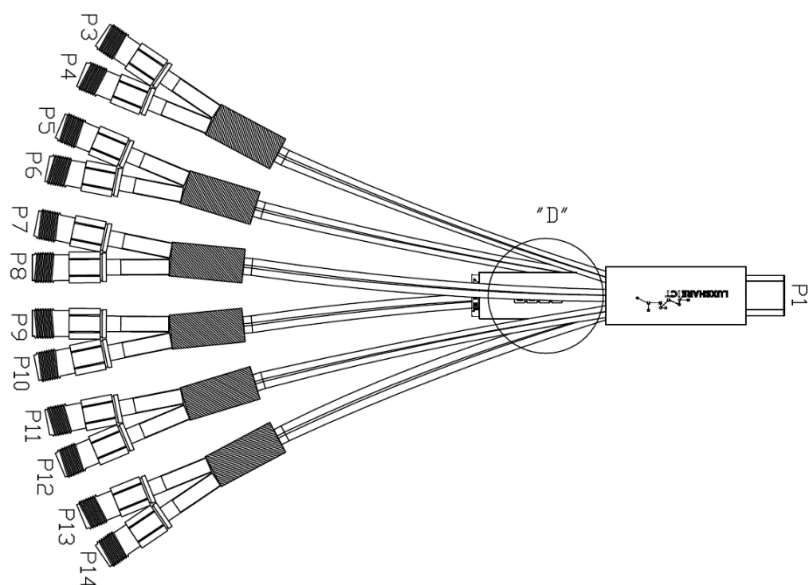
USB Type-C Plug Alt mode Fixture TF21-190G
